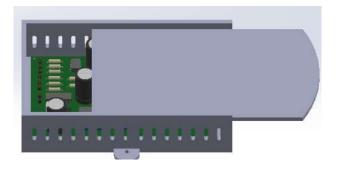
Enclosure design stage 2-Enclosure for the PCB
